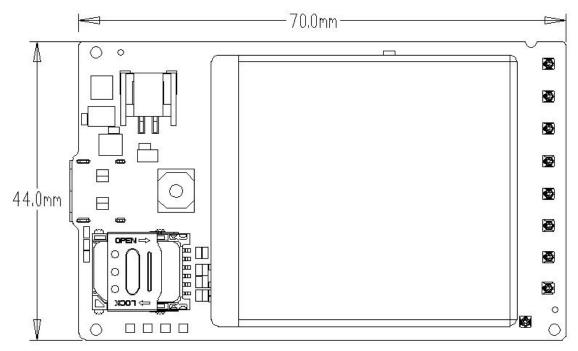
5G S-Module All-in-one Type-L PCB Size
